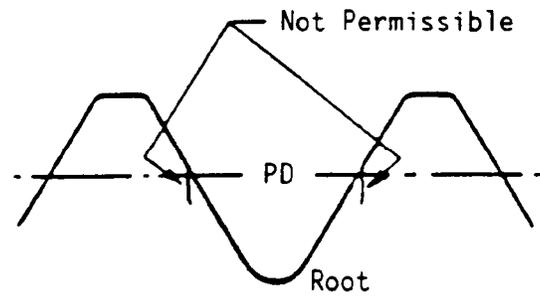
LAPS BELOW PD EXTENDING TOWARD ROOT, ROLLED THREAD
